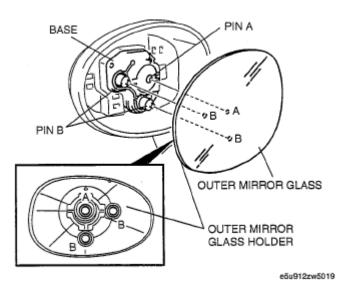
Identifying Outer Mirror Glass Holder & Pins Courtesy of MAZDA MOTORS CORP.
